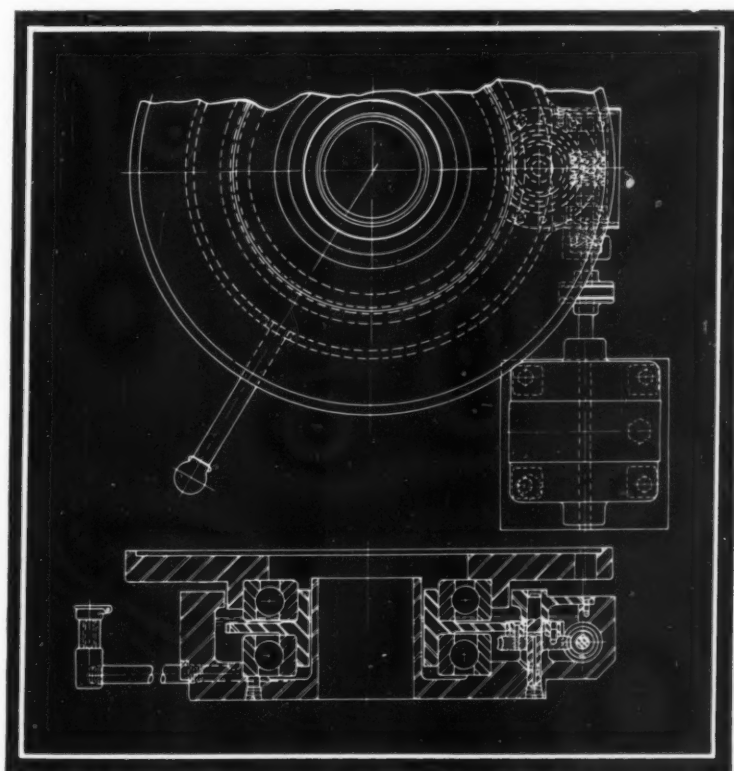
Special arrangement of bearing used to overcome friction and provide accurate measurements on equipment
